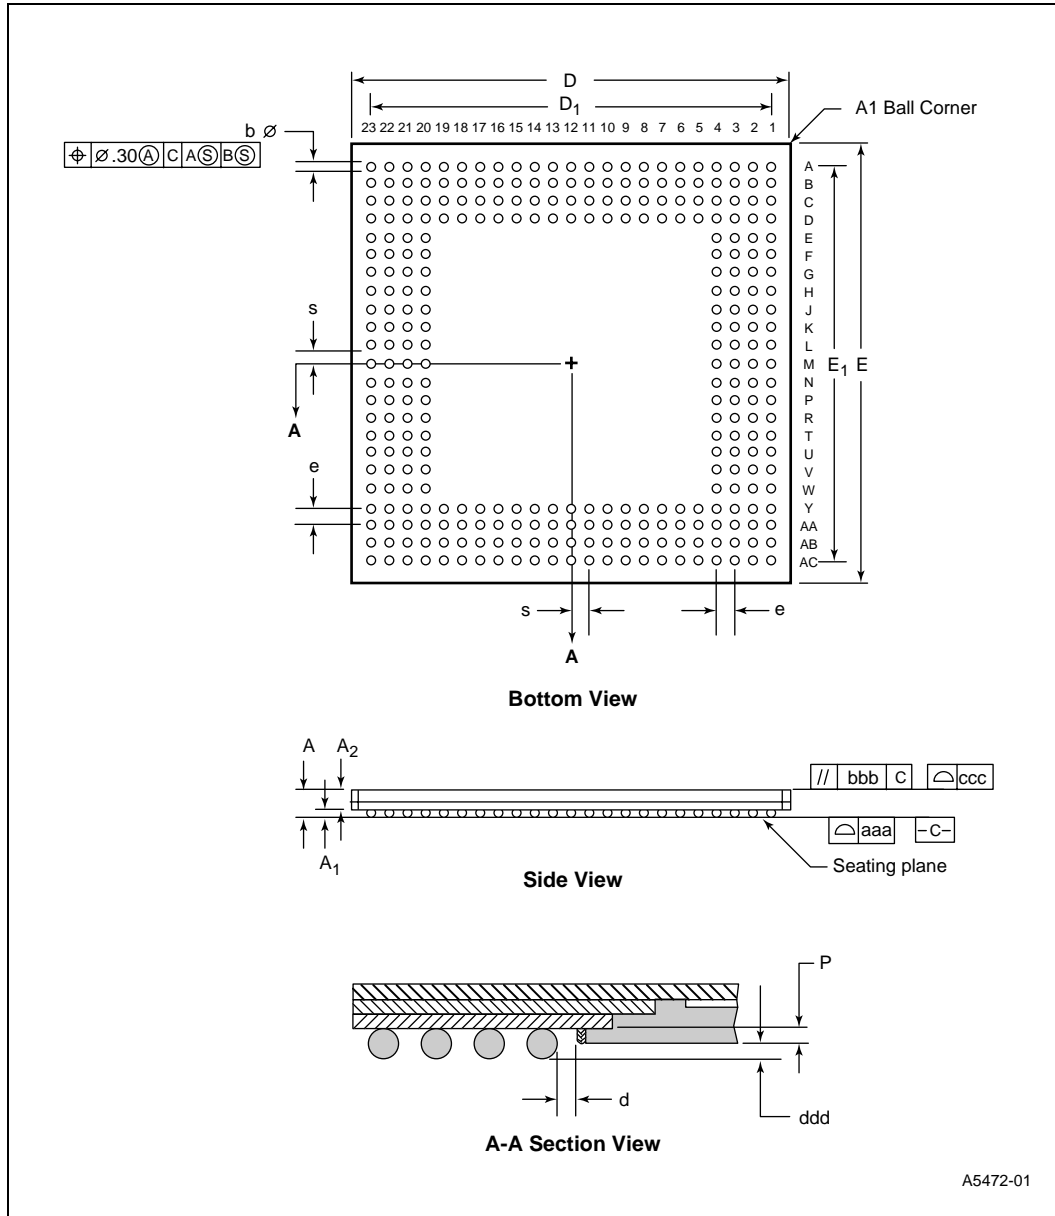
shows the 304-ESBGA package and Table 31 lists the dimensions in millimeters.
